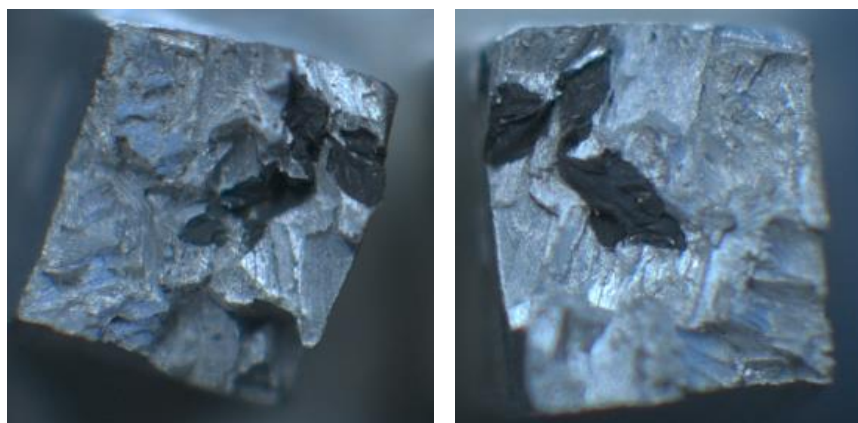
, Fracture surface of a tensile test bar, machined from a commercial purity Mg casting protected by 0.5%SF₆/air. The symmetrical black regions were double oxide film defects. The dimensions of the fracture surface are 5mm * 6mm.
